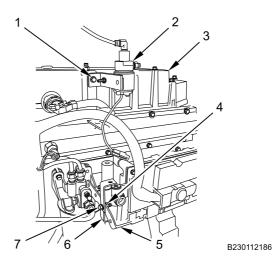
Exhaust Brake Solenoid and Fuel Filter Assembly Bracket.
